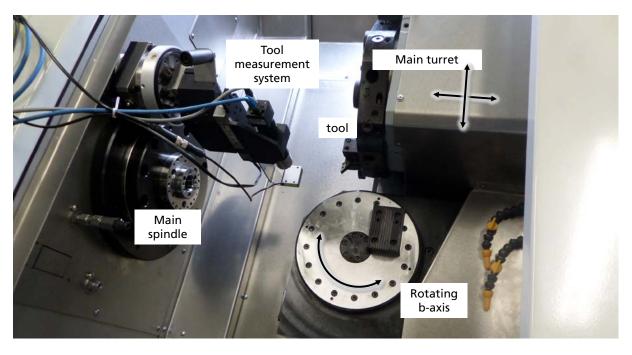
Pictures of the machine and the machine room (view 1): It shows the integrated b-axis and the integrated tool measurement system
